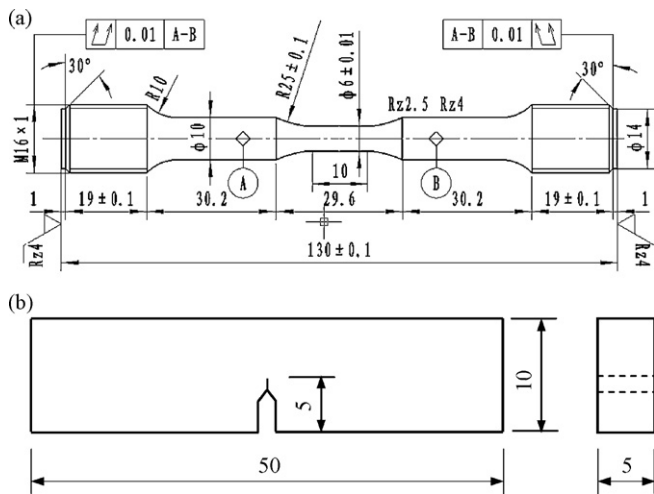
Dimension of specimen for fatigue test and K_{IC} measurement. (a) Dimension of specimen for fatigue test; (b) dimension of specimen for K_{IC} measurement.
